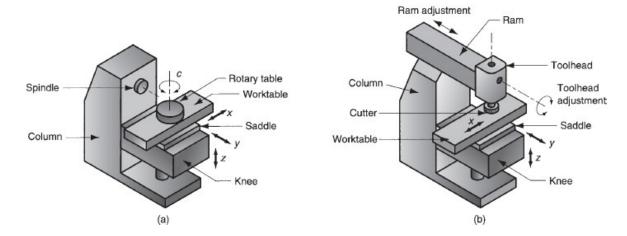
Special types of knee and column milling machine: (a) universal overarm, arbor, and cutter omitted for clarity, and (b) ram type
